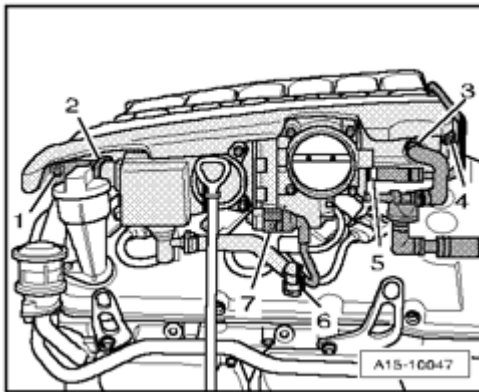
Throttle Valve Control Module 2 J544 Electrical Connection, Vacuum Lines, Crankcase Breather Hoses & Bolts
